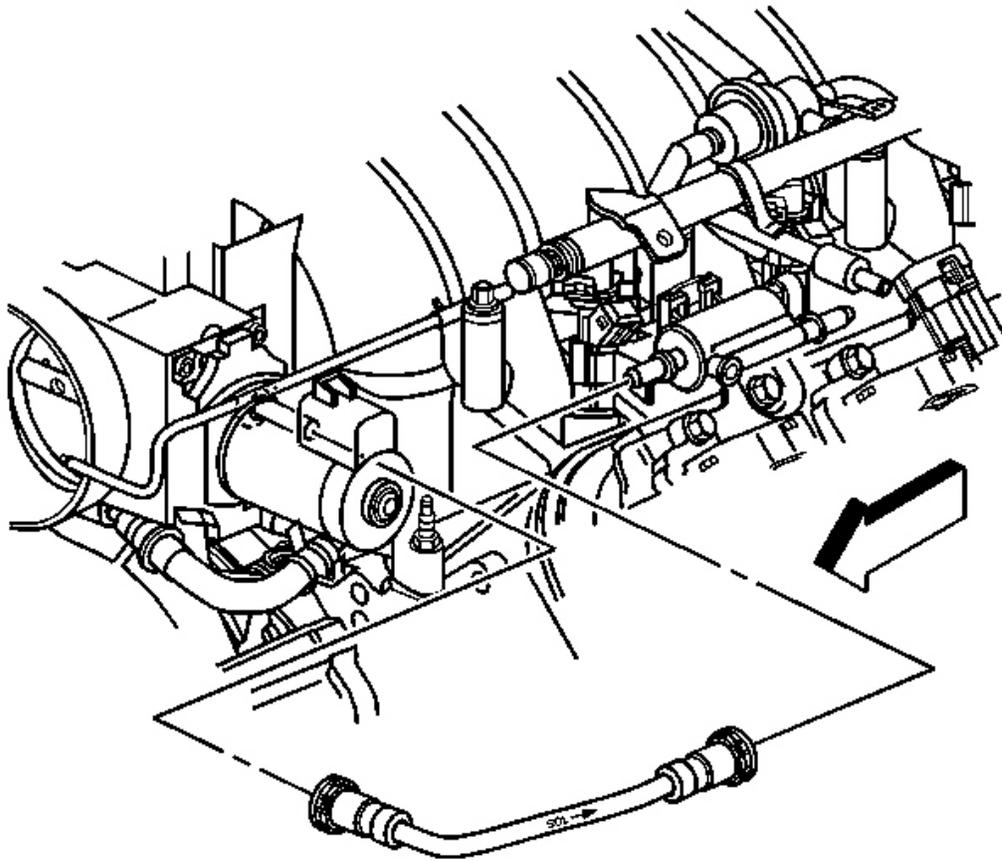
EVAP Canister Purge Valve & Purge Bracket
